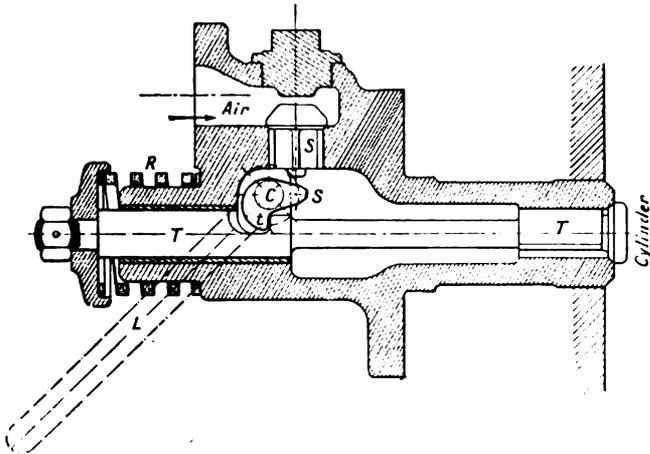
Tangye compressed air Starting Valve. Section.
